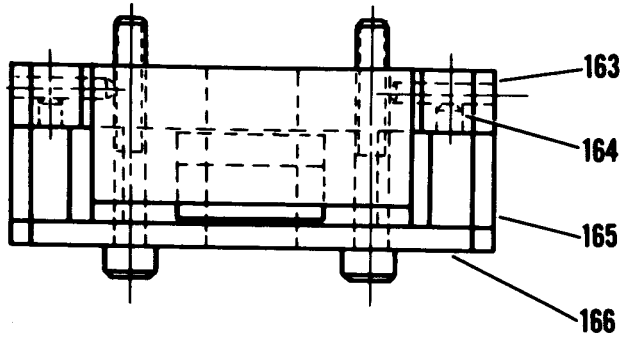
CAM—SHAFT—CLUTCH—BRAKE
